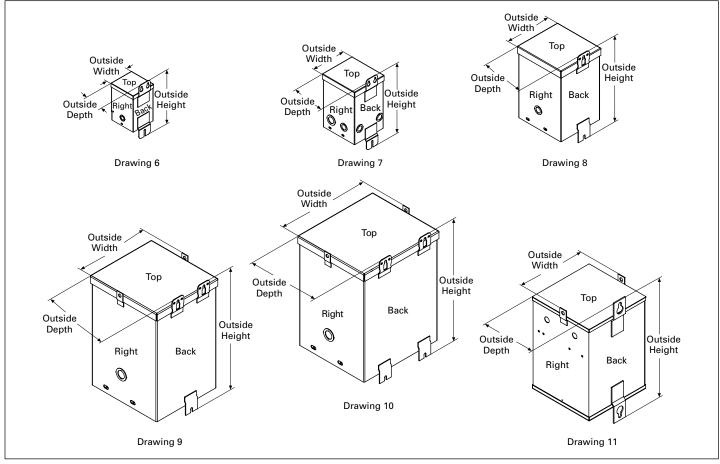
Enclosure Dimensional Drawings—Encapsulated Transformers (Type EP)
